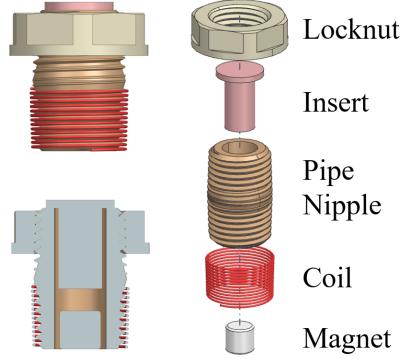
Iteration 1 of the in-house electromagnetic actuator, in assembled and exploded view.
